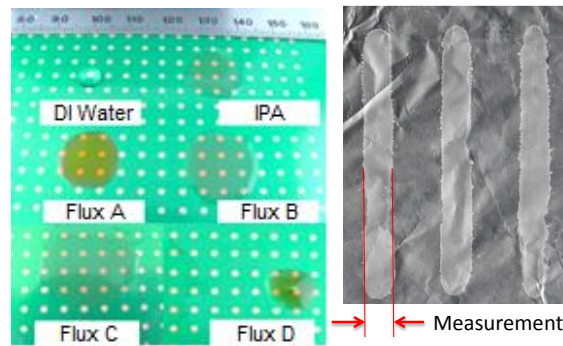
Flux Spread measurement (Left: PCB, Right: Al foil)
